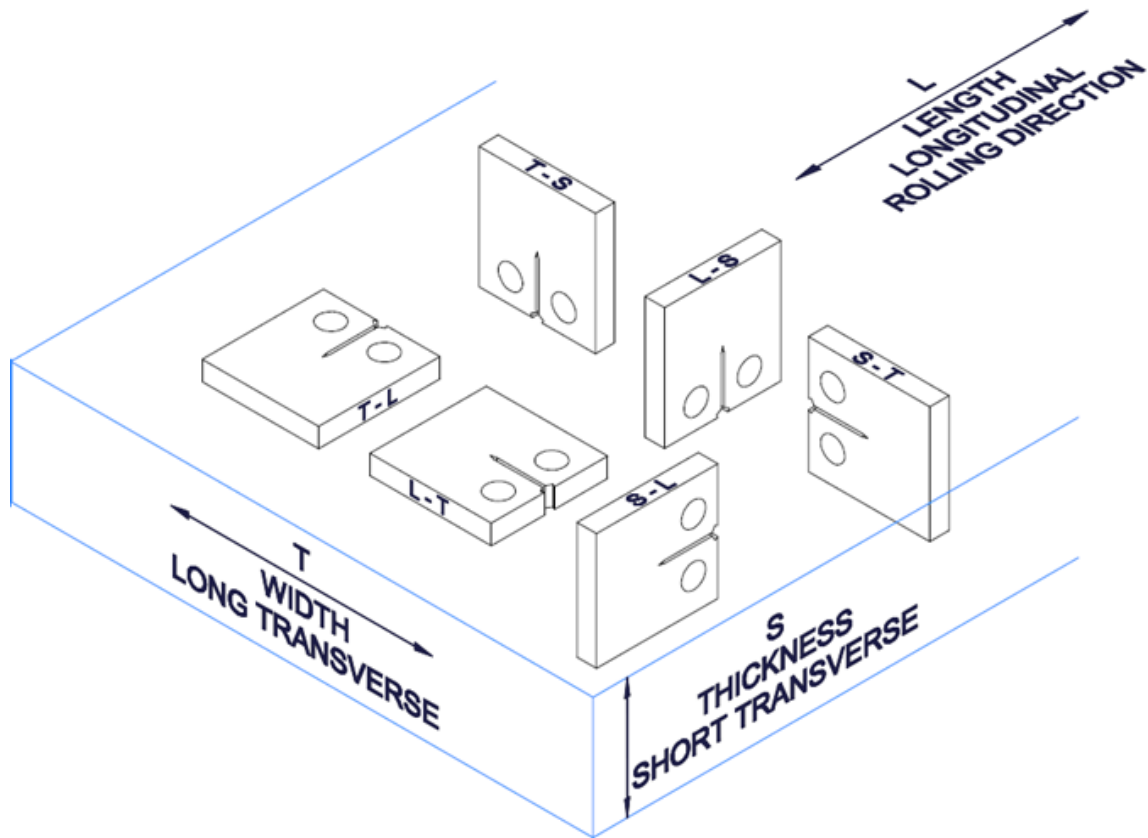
The naming conventions for Compact Tension (CT) specimens sectioned from plate metal. The specimens used in this project were all TL.
